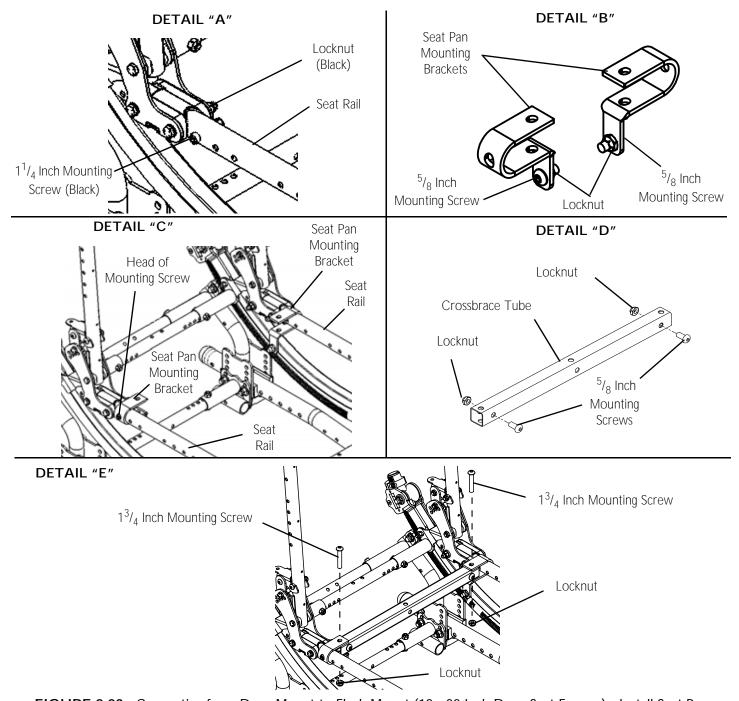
Converting from Drop Mount to Flush Mount (18 - 22 Inch Deep Seat Frames) - Install Seat Pan
